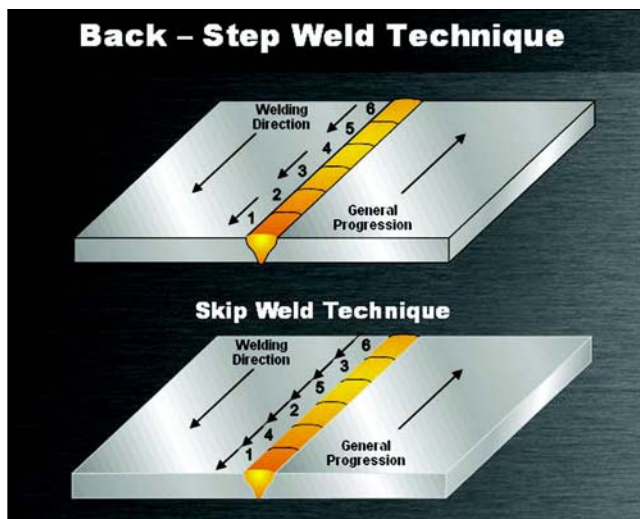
The Back Step Welding Technique Helps to More Equally Distribute Weld Stresses Throughout the Component
